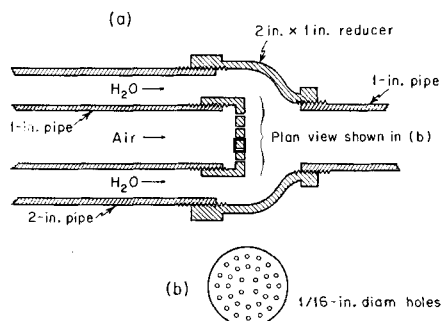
Mixing section. (a) Cross section. (b) Plan view.
